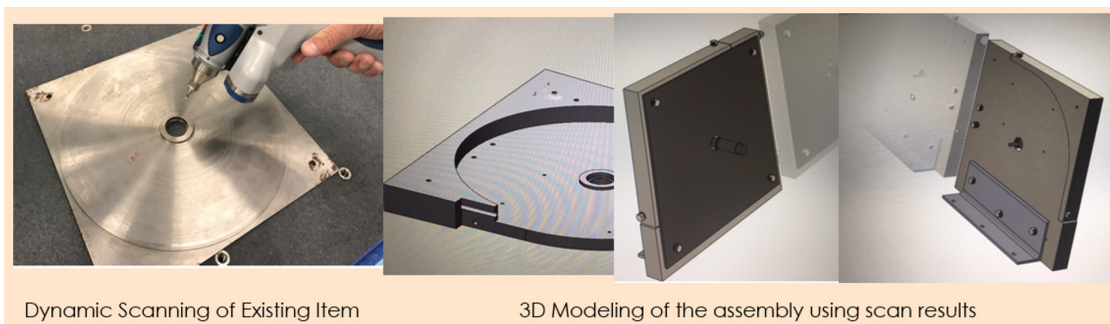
Multiple-piece steel assembly reverse engineered using laser light scanning, modeled, and prototyped using additive manufacturing to confirm fit prior to using the modeling results to manufacture the pieces in a traditional machine shop
